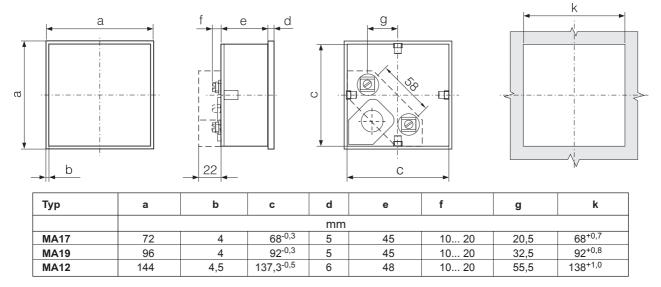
External dimensions of MA17, MA19 and MA12 meters
